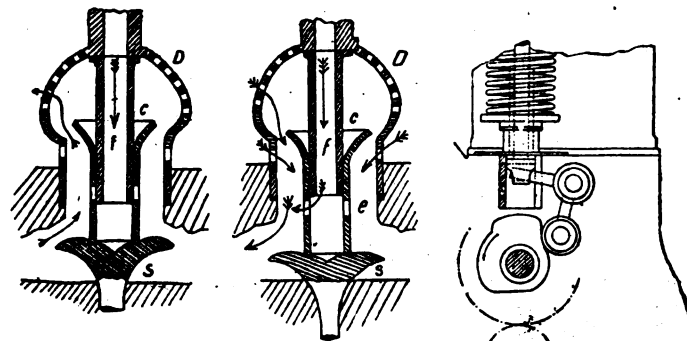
Sectional Views of Farcot Combination Inlet and Exhaust Valves and Valve Gear.
